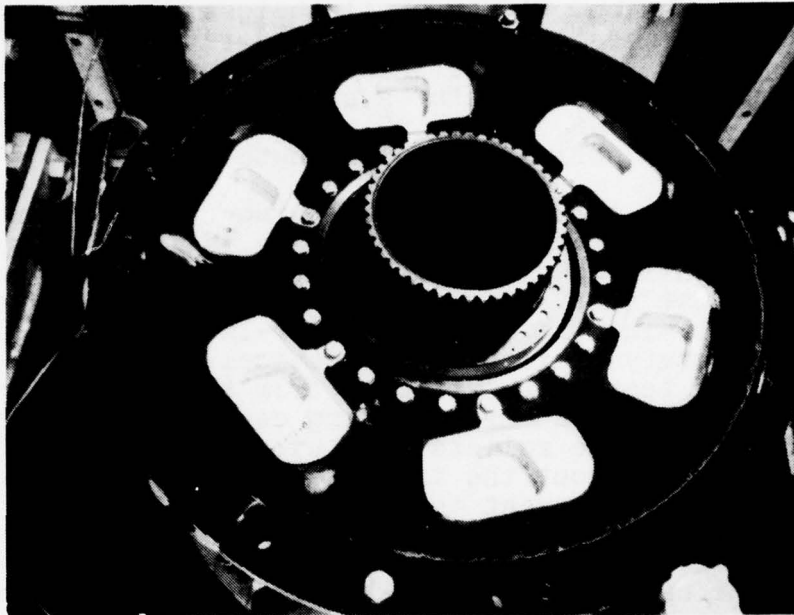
View of gearshaft support case showing oil collectors installed prior to green run for fourth test.
